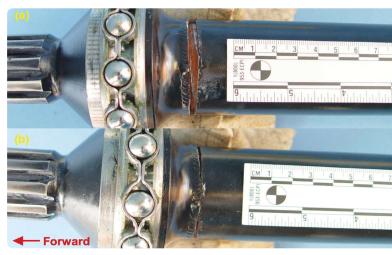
The fractured forward weld of the right side propeller shaft tube assembly, showing (a) a side with complete fracture and (b) the small section still intact.
